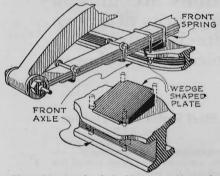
Metal wedge, bolted between spring and spring seat on axle, will improve steering.
